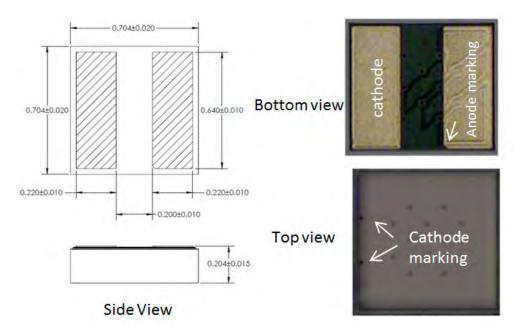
Mechanical dimensions for LUXEON FlipChip Royal Blue L0F2-Bxxx050002751.
